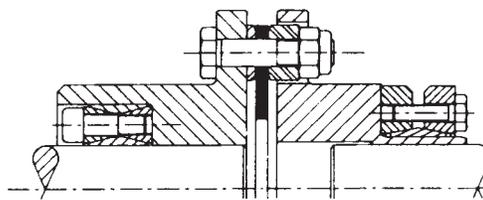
Single flexing coupling mounted with one Shrink Disc® and one internal Locking Assembly.
